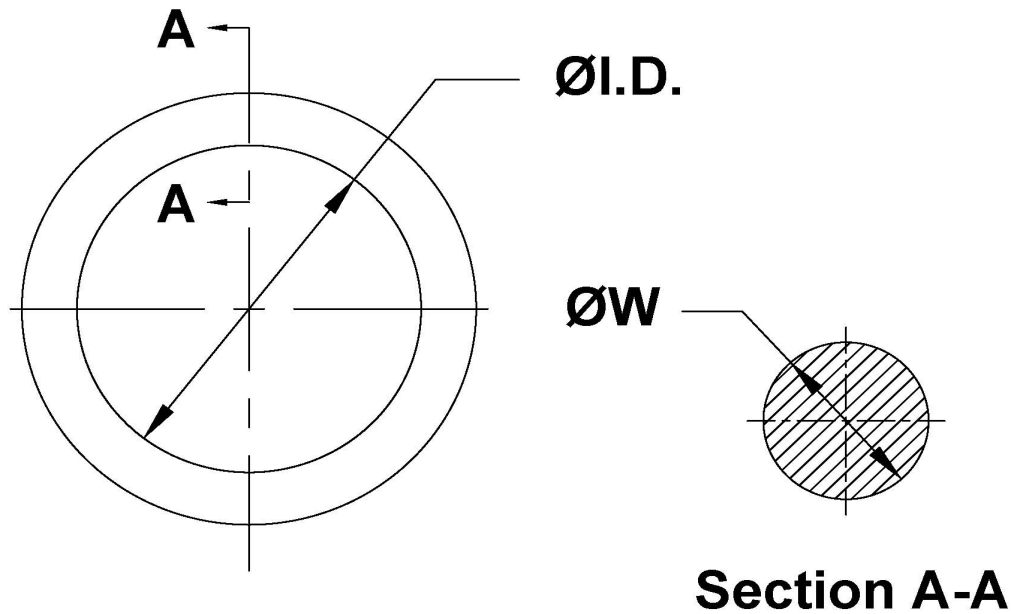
O-Ring dimensions - width (ØW) and inside diameter (ØID)
